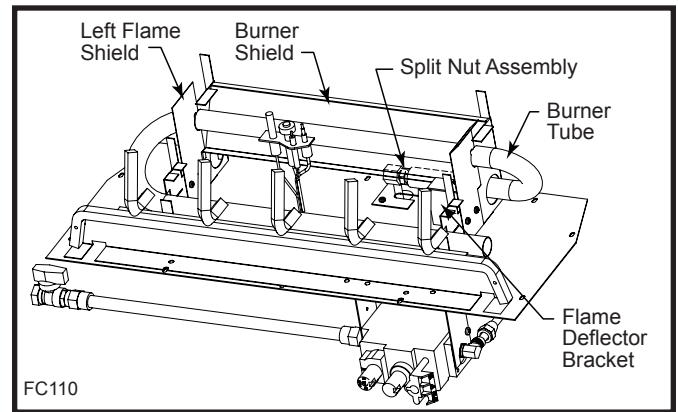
Remove flame shield, flame deflector bracket and burner shield. Remove air shutter and slide burner tube to the right.
